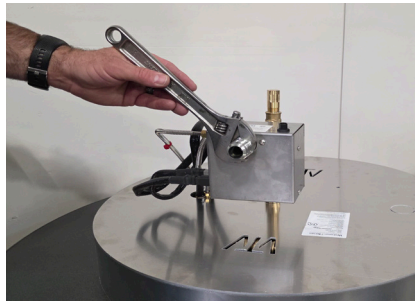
Connecting the Flared Fitting to the Platinum Valve
